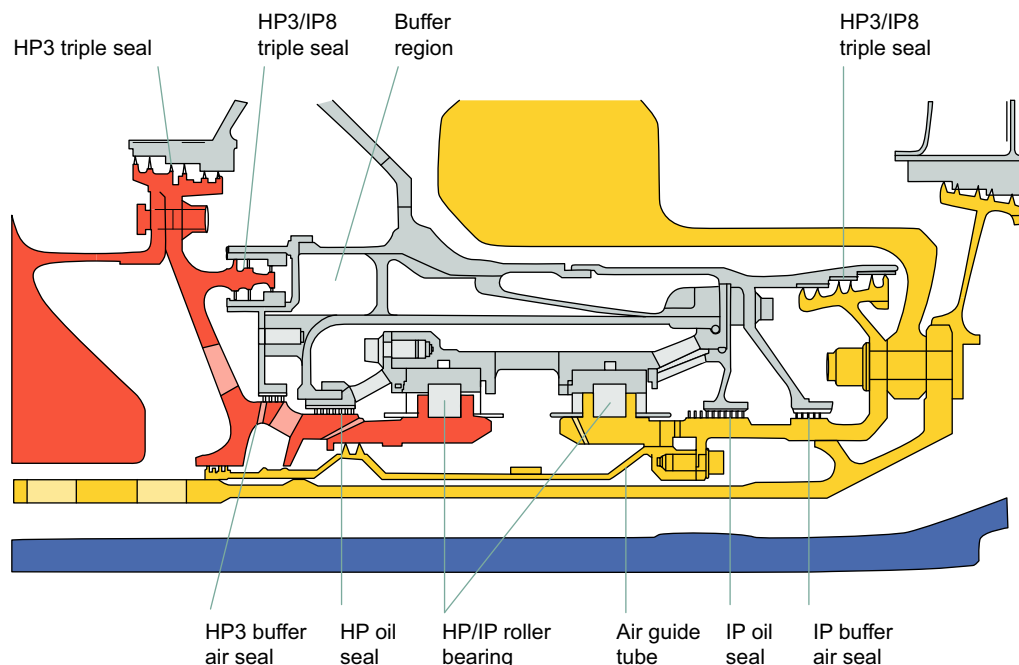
HP/IP hub structure on a three-shaft engine. This structure houses the HP and rear IP roller bearings. (Source: Rolls Royce.)
